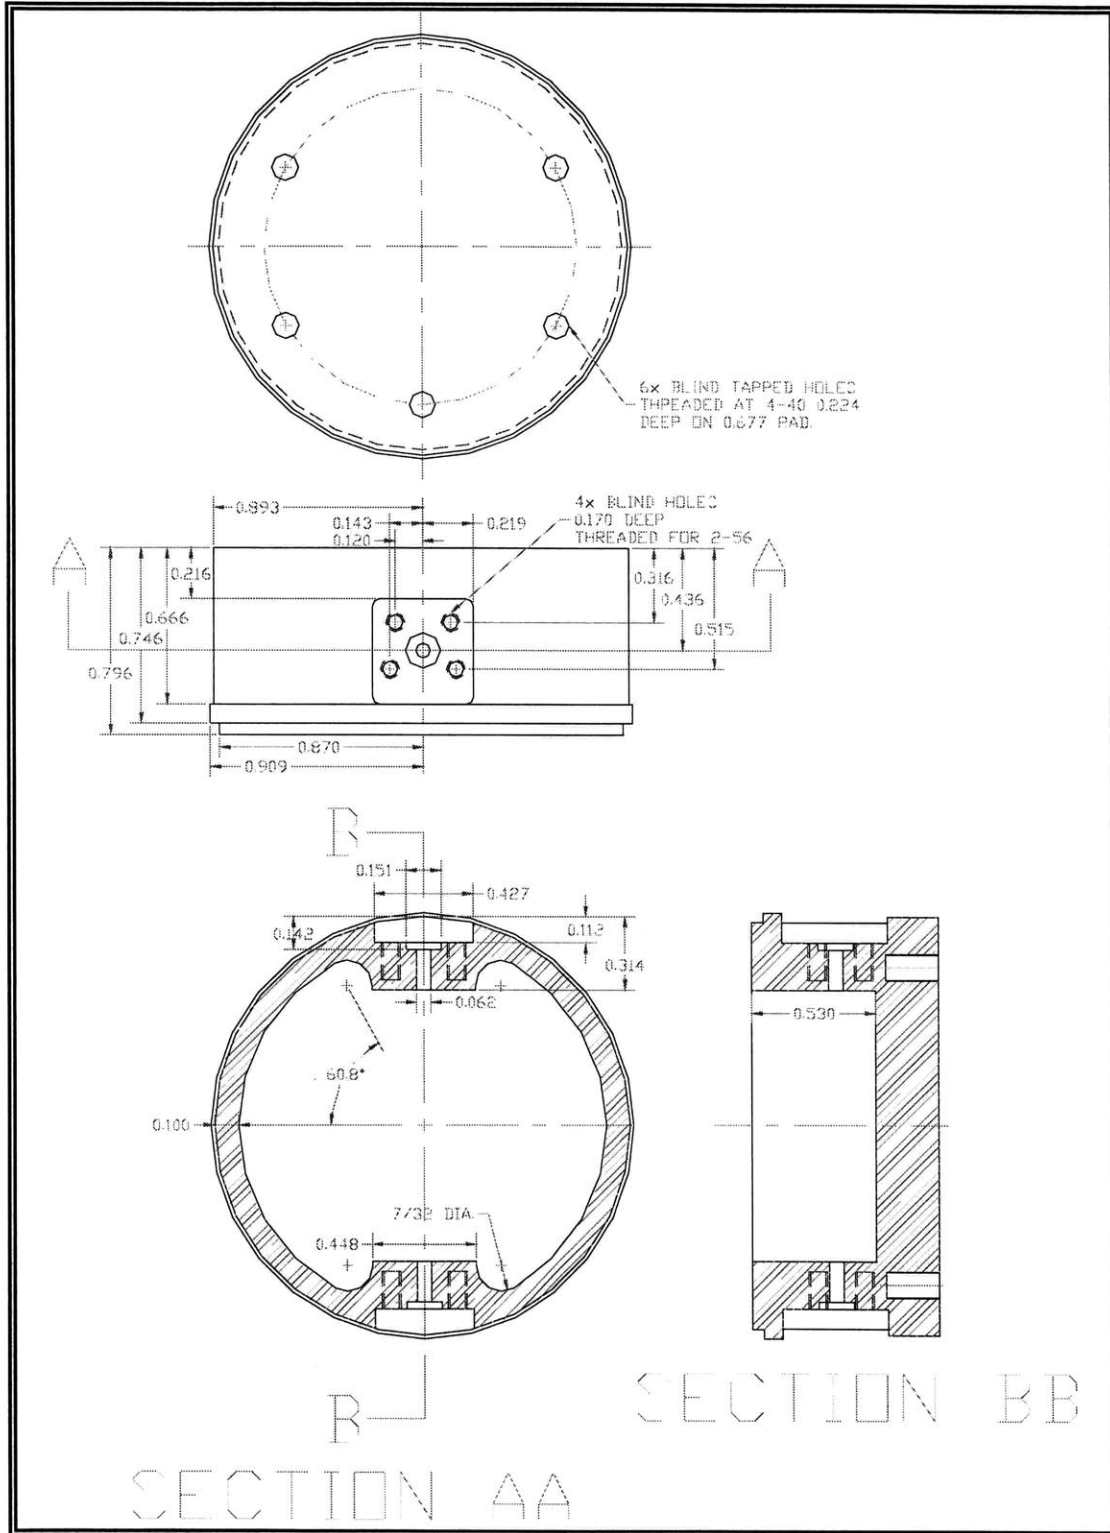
This technical drawing of the high-pressure reservoir shows the detailed machine work that goes into the high-pressure flange fixtures
